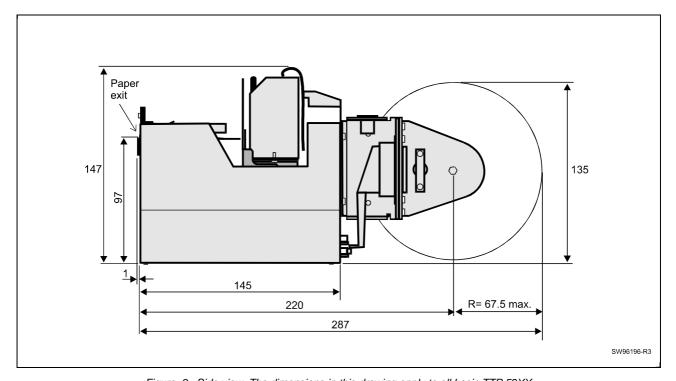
Side view. The dimensions in this drawing apply to all basic TTP 52XX models with up to 135 mm paper roll diameter.
